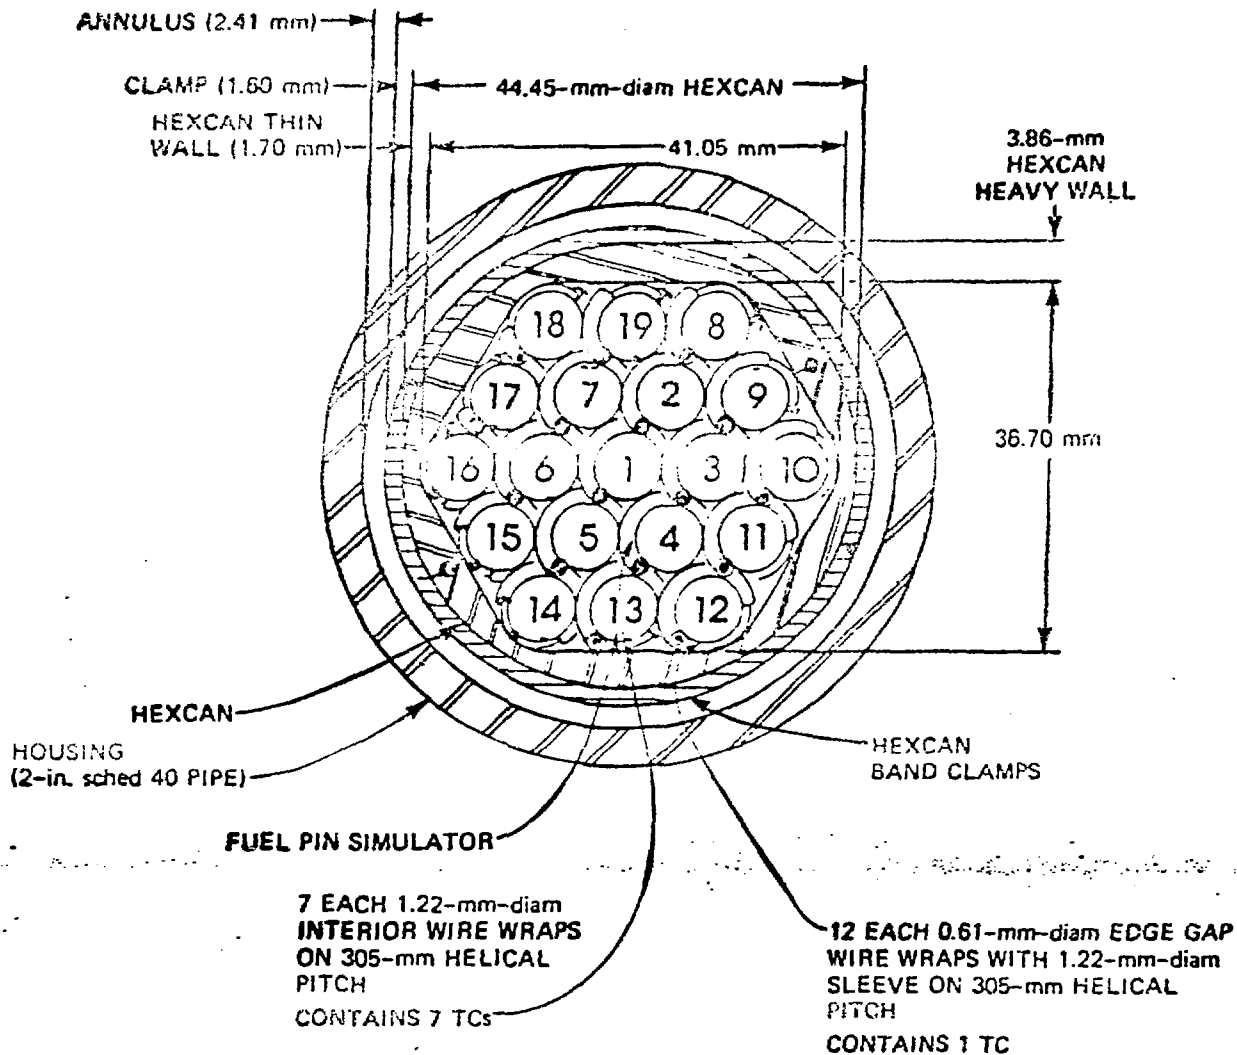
THORS-SHRS Assembly 1 bundle cross section.
